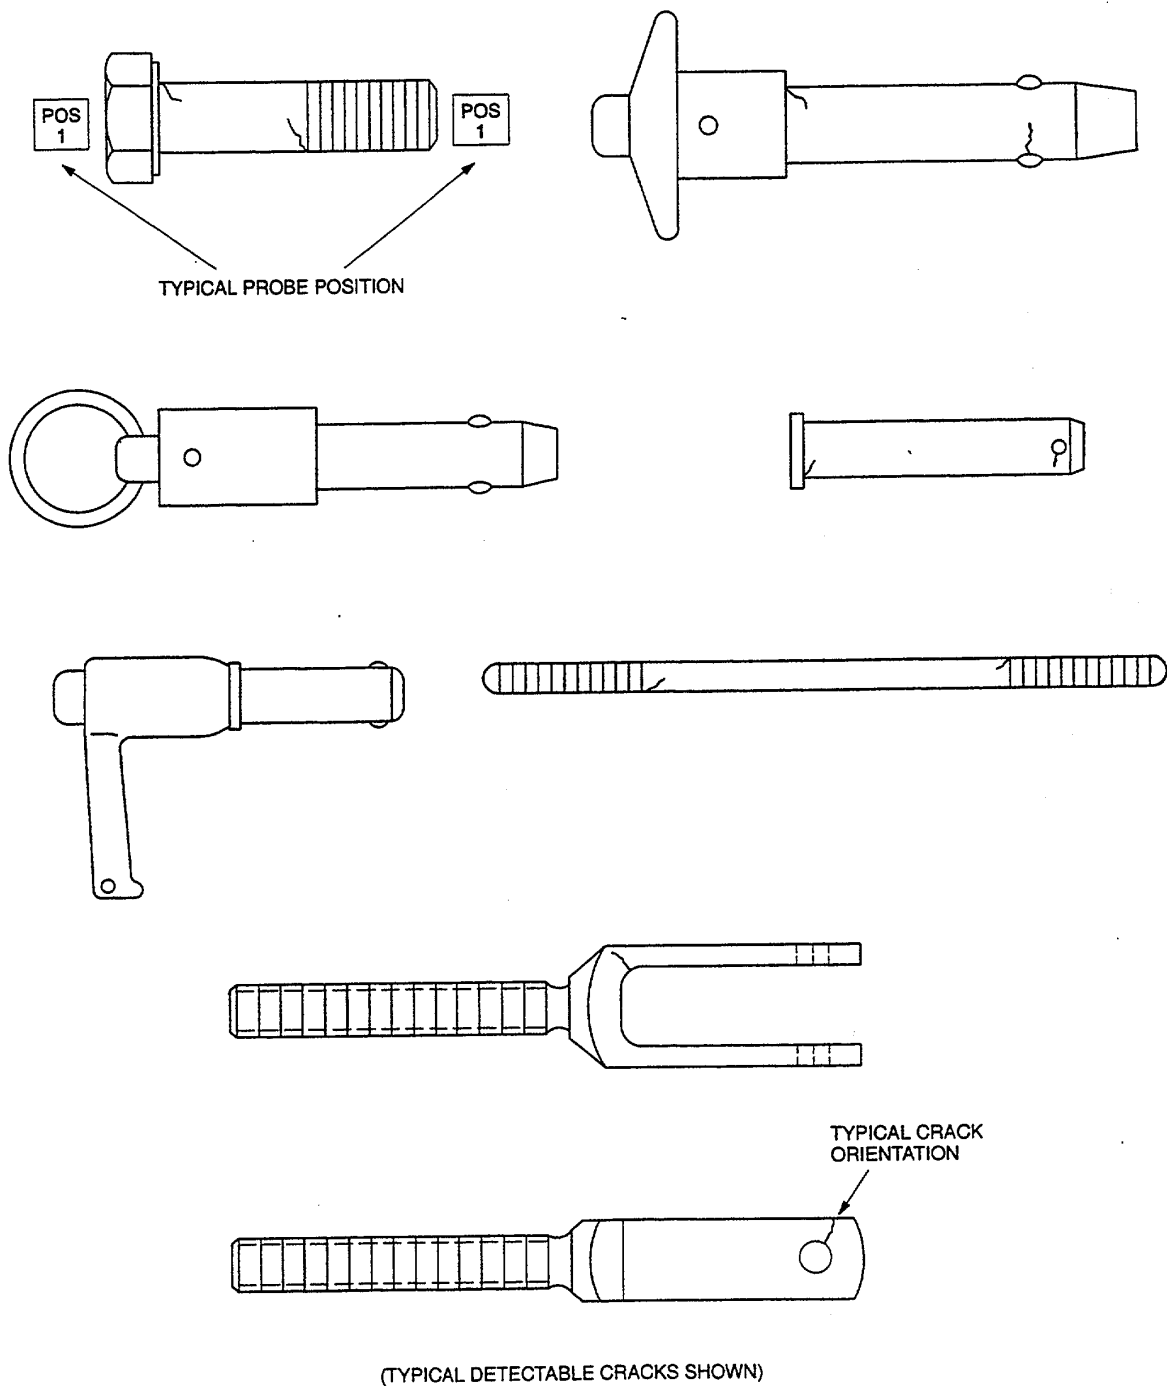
Bolts , Rod ends, Turnbuckles, Rods, and Pins
